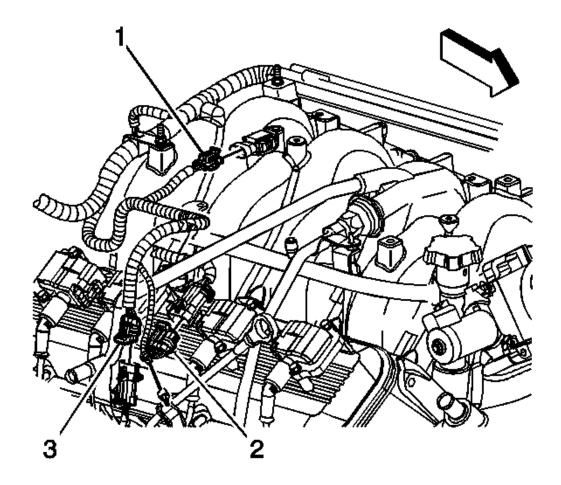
View Of Ignition Coil, ECT And MAP Sensor Electrical Connectors Courtesy of GENERAL MOTORS CORP.
